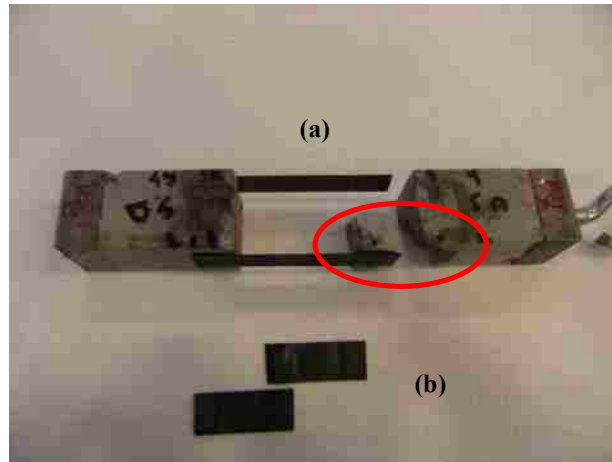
Failure of lap shear joints (a) double lap and (b) single lap
